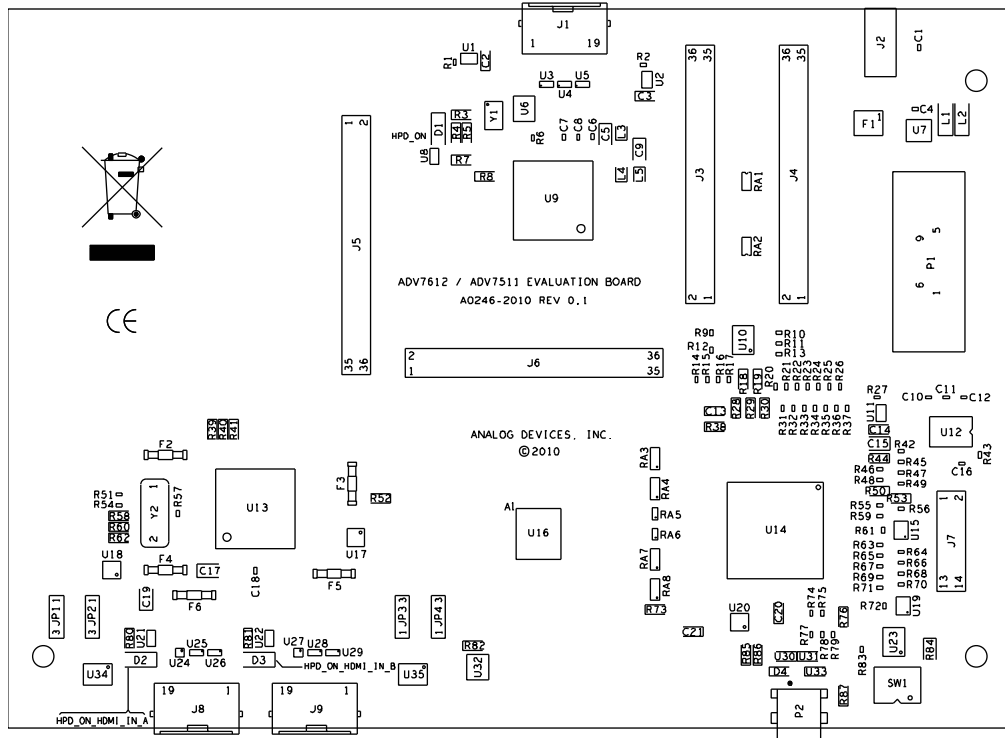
Assembly Drawing (Top Side) of the EVAL-ADV7612-7511
